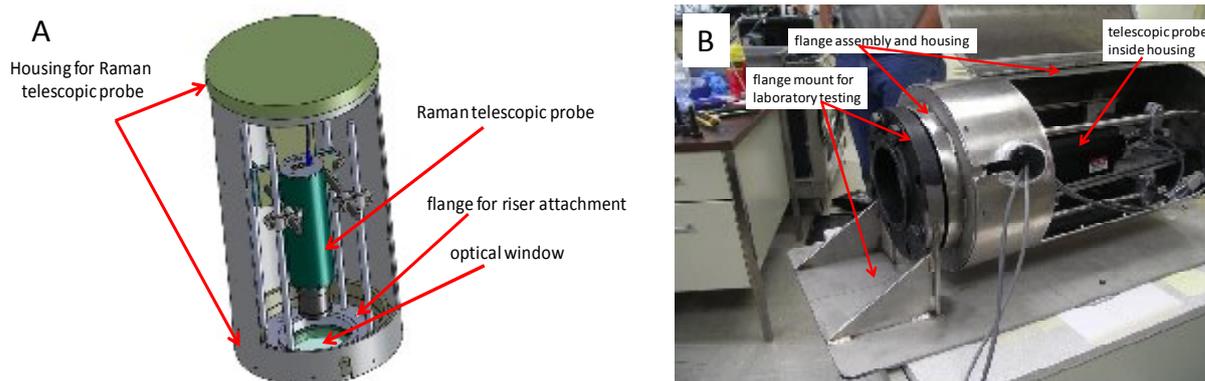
A) schematic drawing of the flange assembly containing the shielded housing and Raman telescopic probe. B) Photograph of Flange Assembly and Housing Containment with Raman Telescopic Probe Installed
